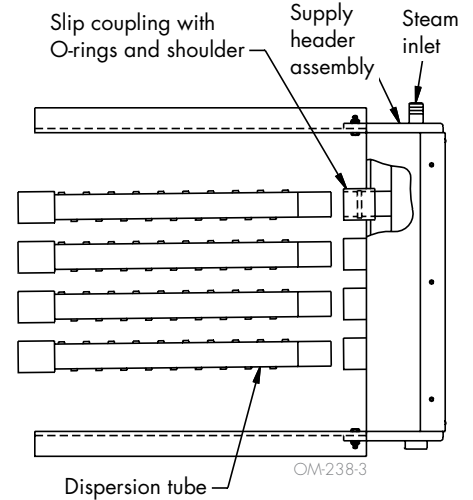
SLIP COUPLING WITH O-RINGS AND SHOULDER
